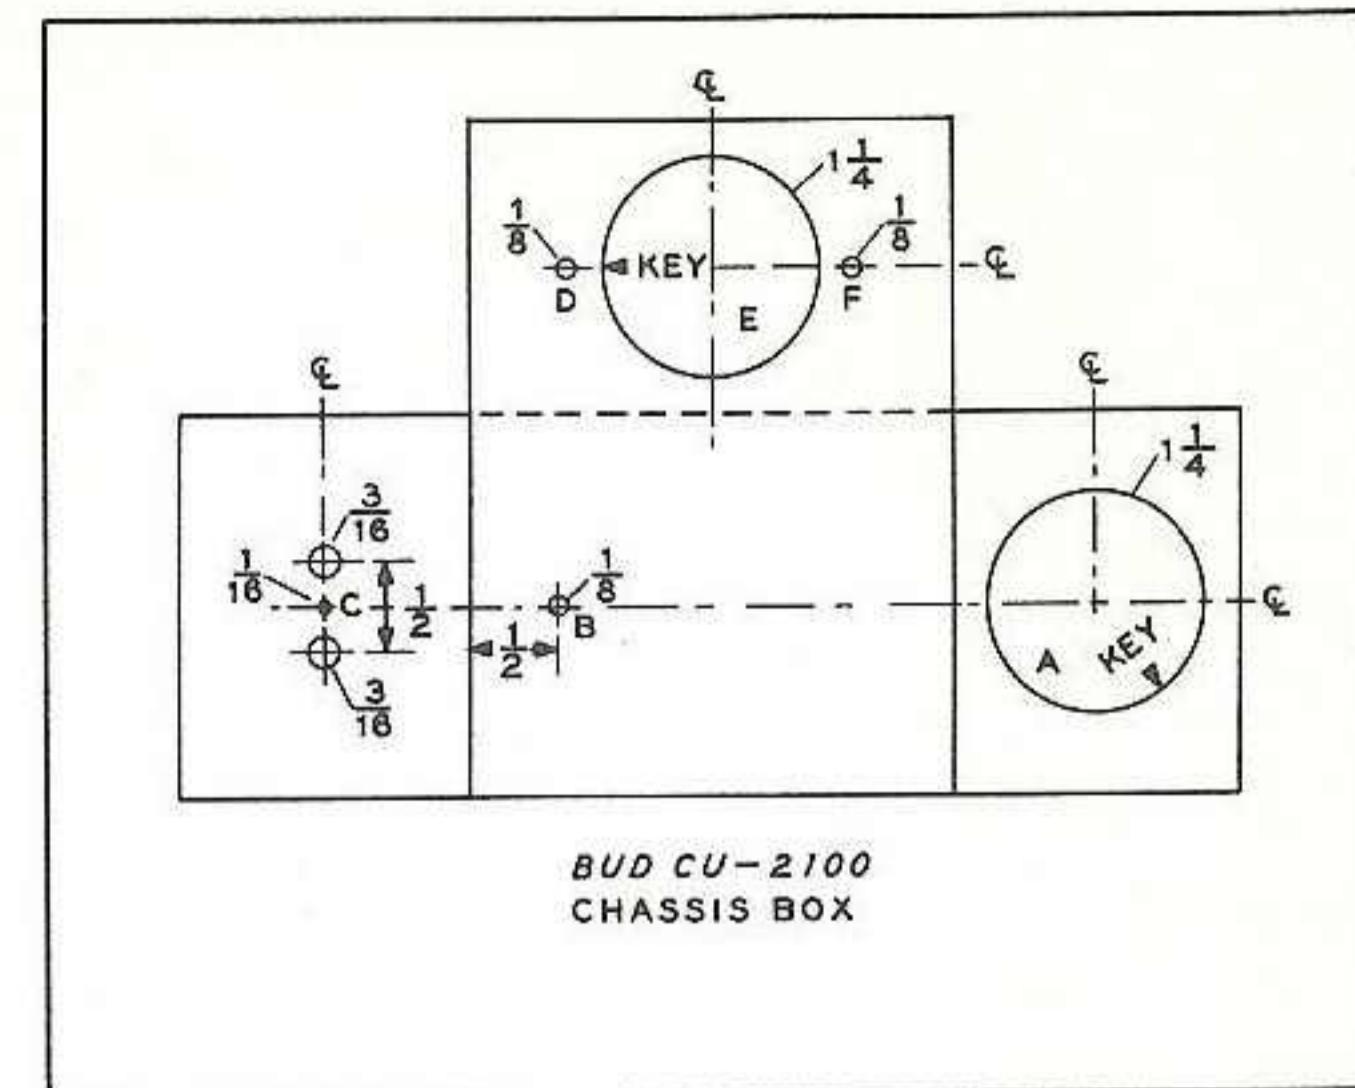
Chassis layout for the adapter. One side of aluminum box is cut off and attached to the other half with sheet metal screws. Crystal receptacle is mounted on "top" of box, with octal power plug on "bottom."
